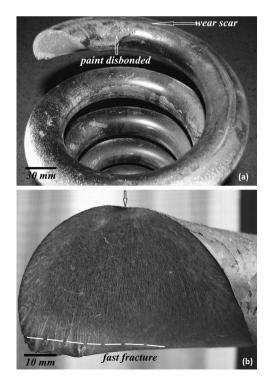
Fracture photographs of the failed spring. (a) Fractured spring and (b) close-up of the fracture surface.
